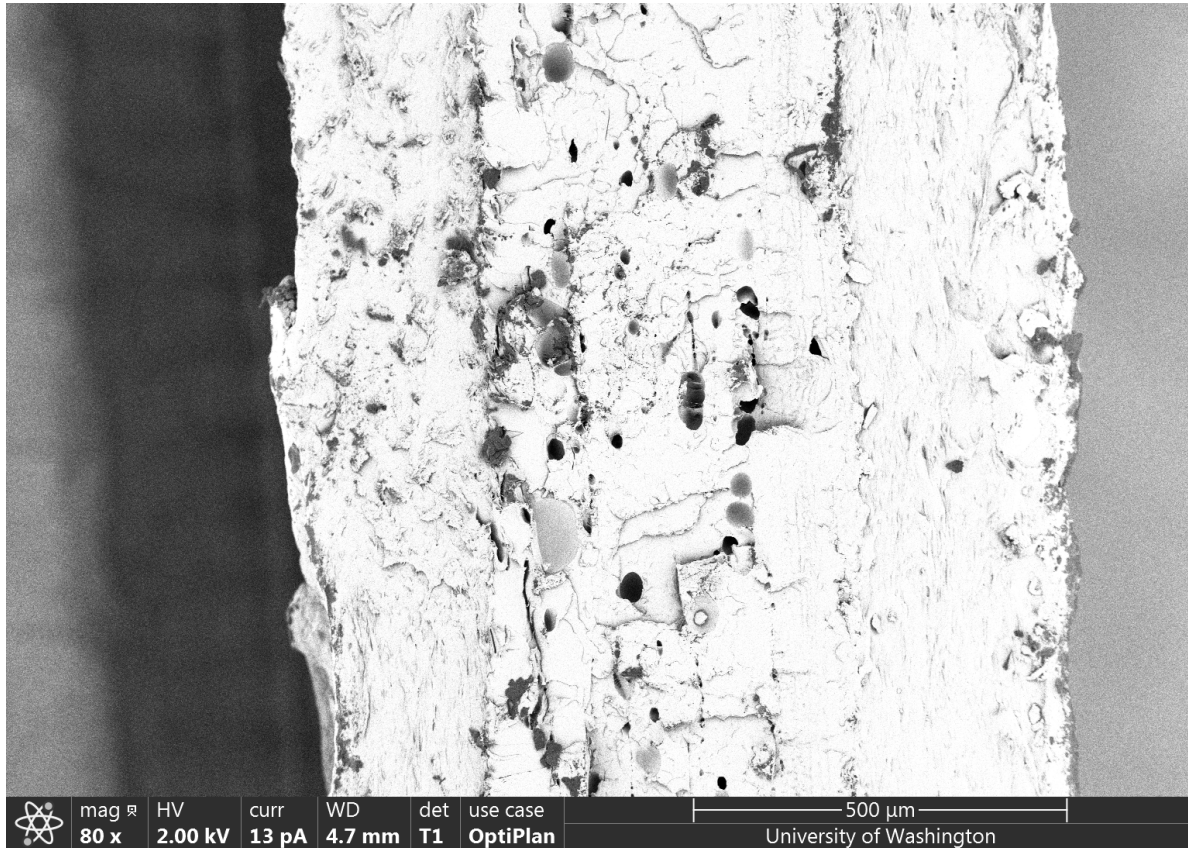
3D printed 1MPa saturated PLA at extrusion temperature of 190°C
